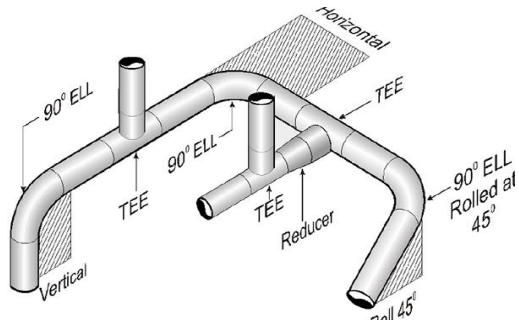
A view of typical elements of the refinery piping installation where pipes butt joints are welded in horizontal – PC (2G) and vertical position – PH (5G) [2,8,9]
